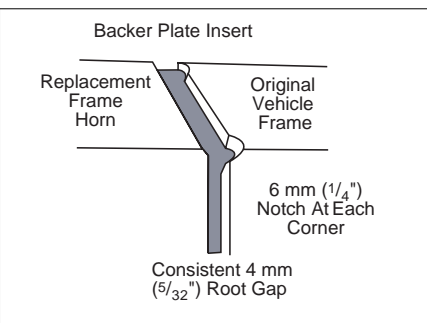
The frame horn kit is installed with a GMA (MIG) welded butt joint with backing. (Courtesy of Tech-Cor)
